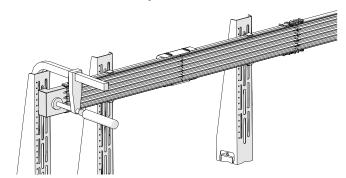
Mounting block (Order Number: 08-V015-0492-00x) fasten with a screw clamp
